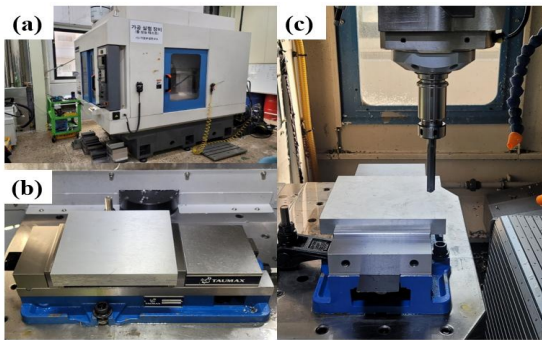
Experimental set up : (a) Tapping machine, (b) Workpiece, (c) Drilling
